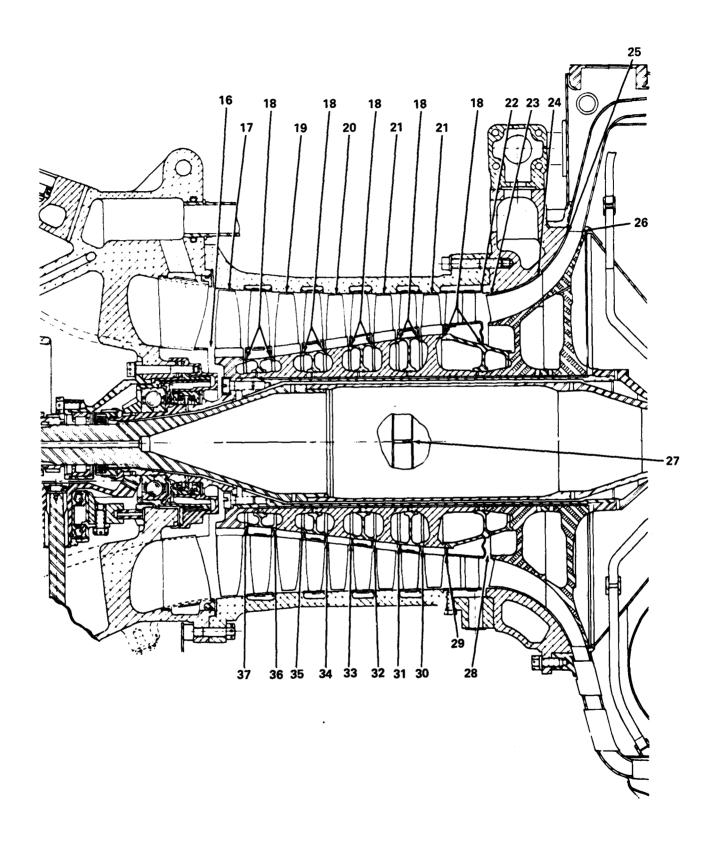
Fits, Clearances and Backlashes (T53-L-11- Series Engines) (Sheet 3 of 5)
